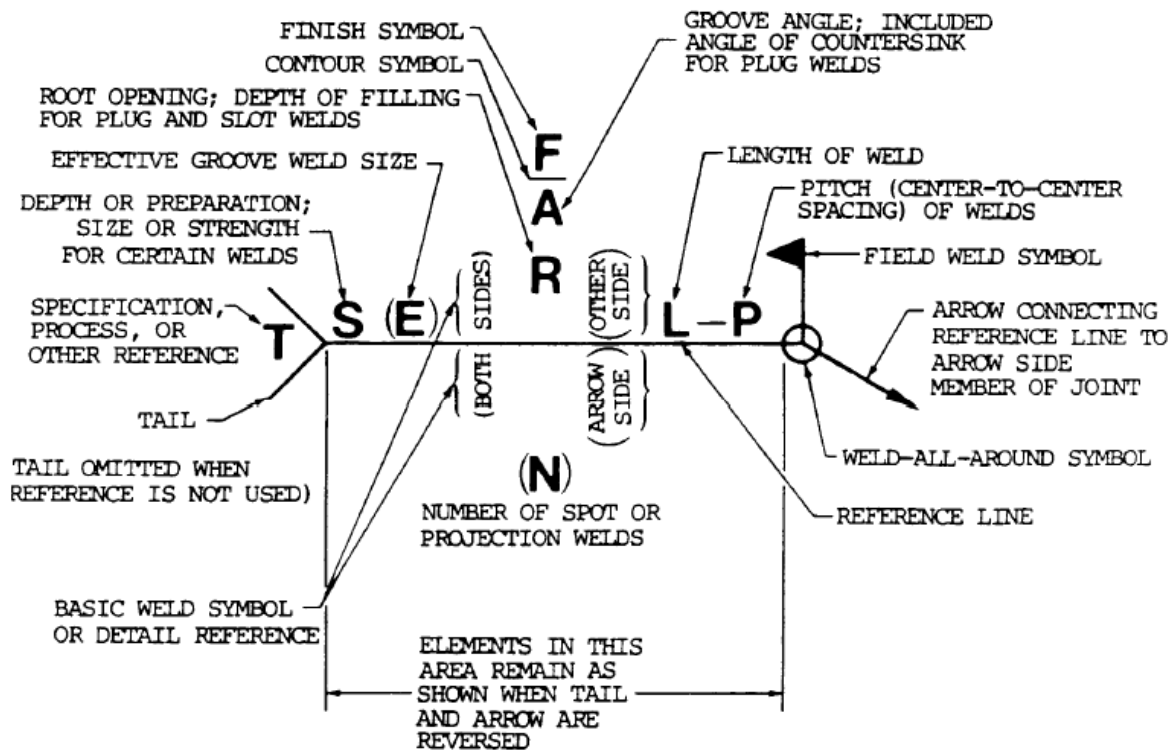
[17] illustrates the elements of a welding symbol that is in accordance with[4].
